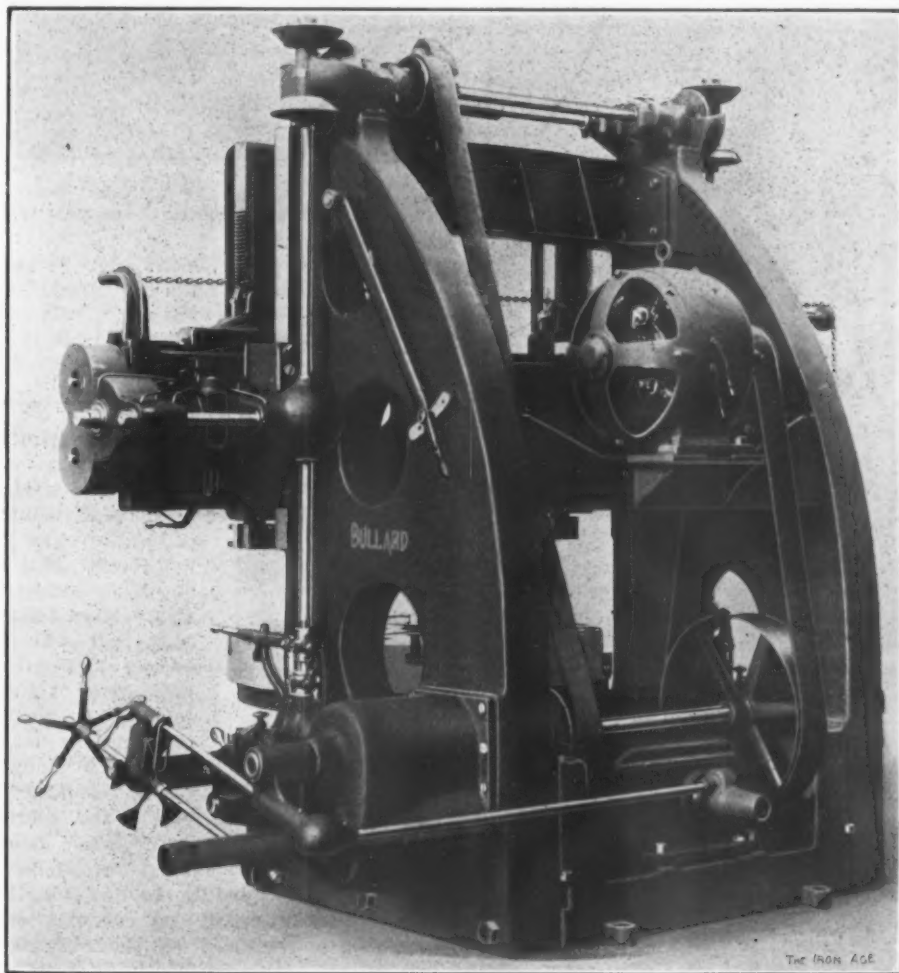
A Rear View of the New Bullard 54-Inch Boring and Turning Mill.
